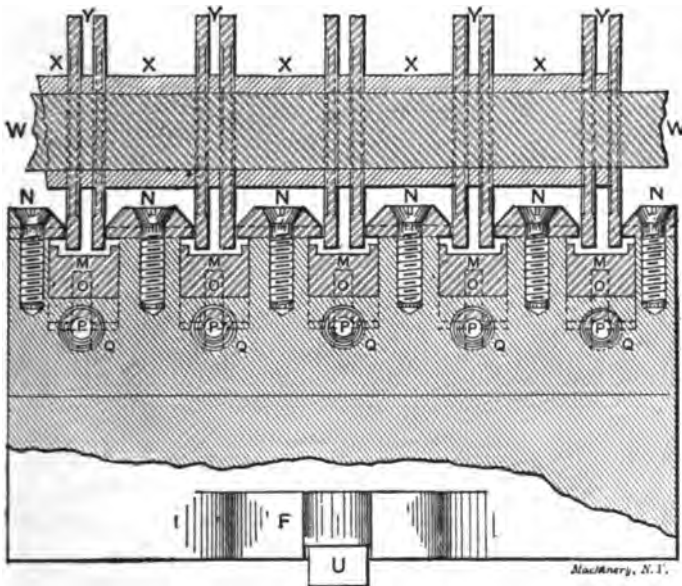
Longitudinal Section of Fixture, Fig. 63, and Gang of Cutters
